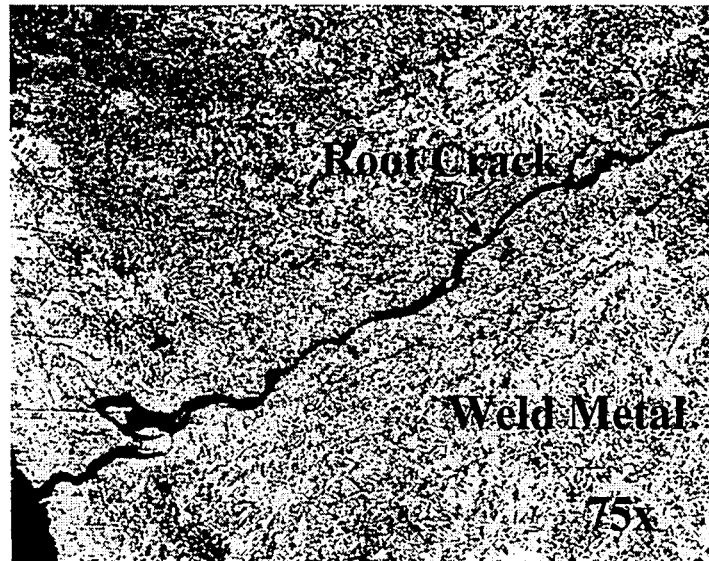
Hot Crack at Root of Specimen 36G-17HR-Bottom-right Section
